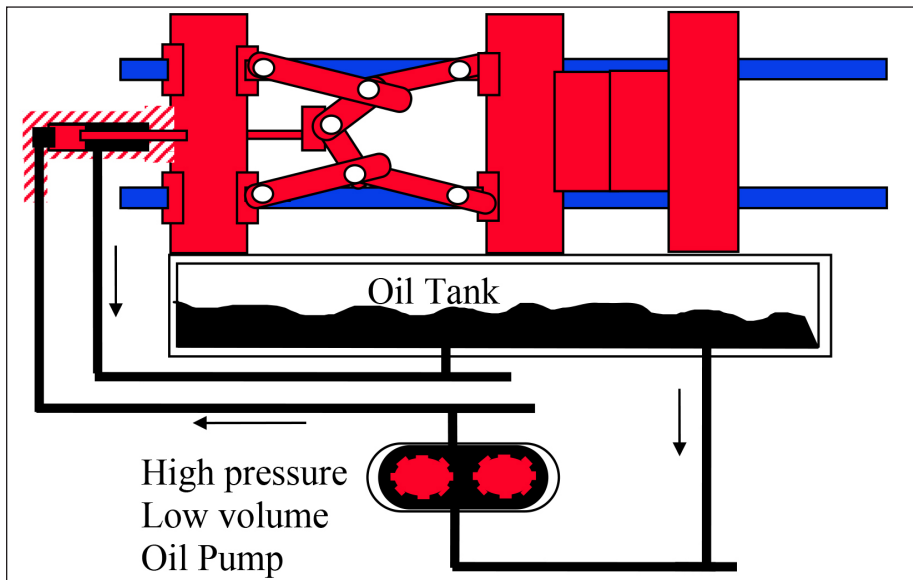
Hydraulic schematic showing high pressure die closing
